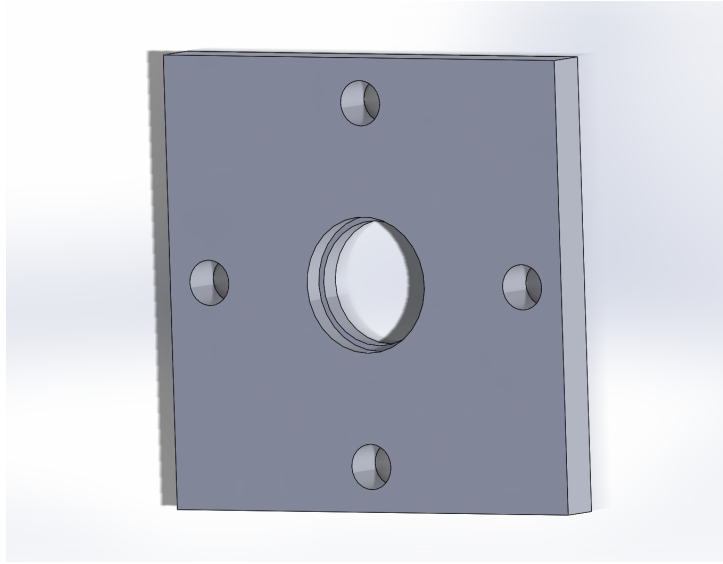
O-ring holder plate that will be attached to the connector plate to hold the o-ring in place when the shaft rotates.
